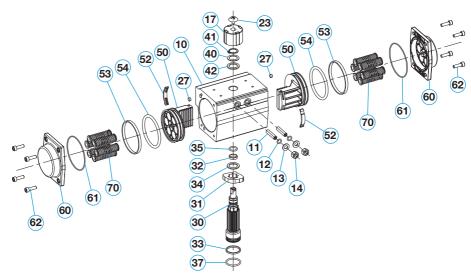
Exploded-view drawing of all individual components of rotary actuator bar-agturn
